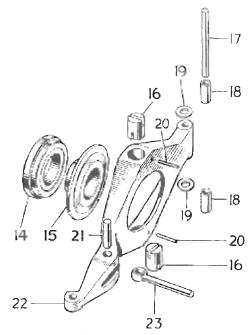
Exploded operating lever assembly (Herald 1200, 12/50 and Spitfire)
